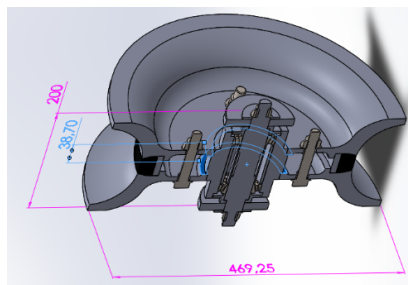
Dimensions controlled using tolerance analysis.
